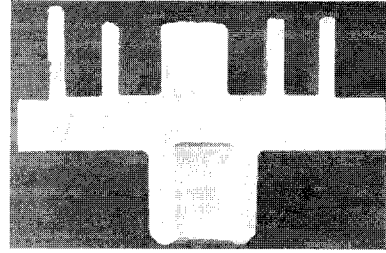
The section of scroll rotating part manufactured by conventional hot forging
